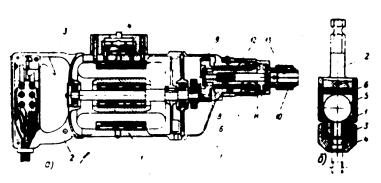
Electric wrench - a schematic drawing of electric wrench
